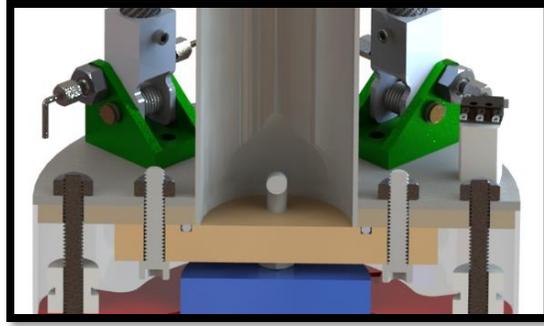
Section view of the Removable Sealing Bulkplate at the bottom of the RRS Tube.
